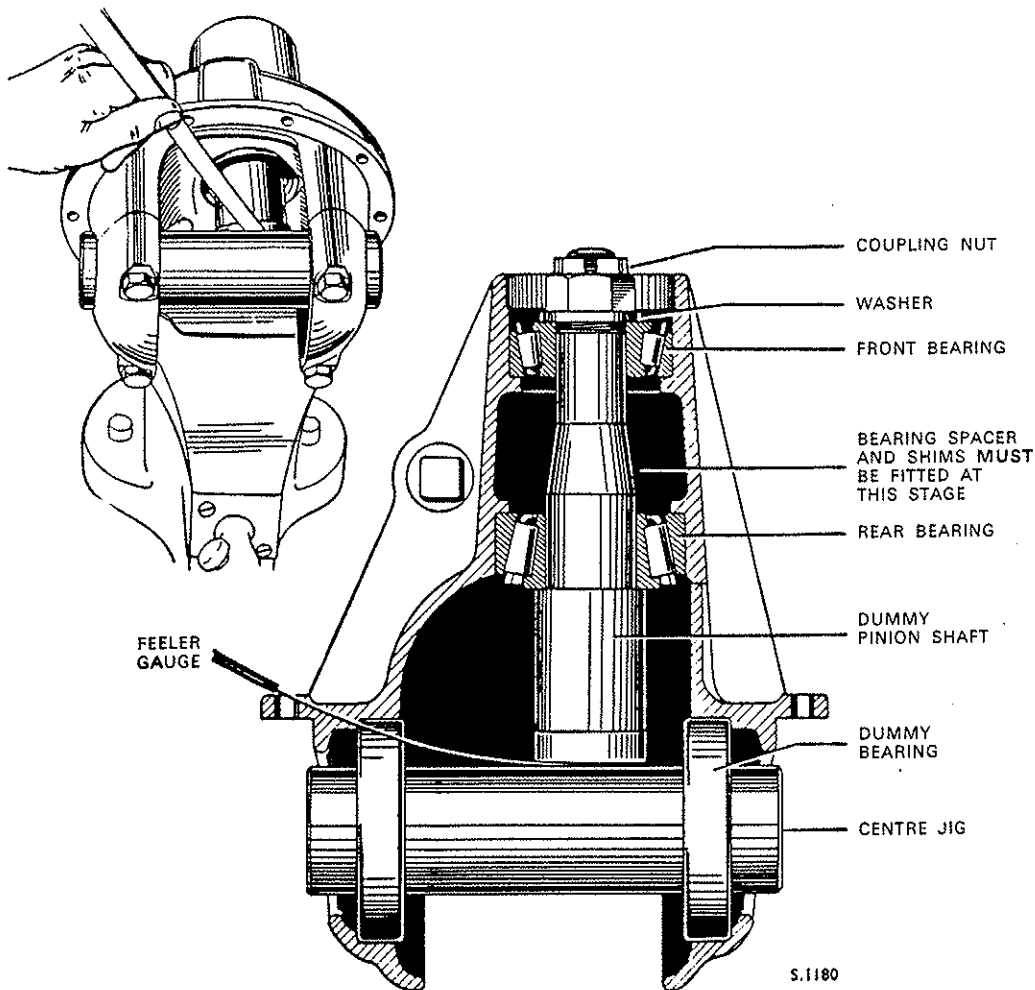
Method of determining correct shimming between the pinion head and rear bearing, using Churchill Tool R.G.329
